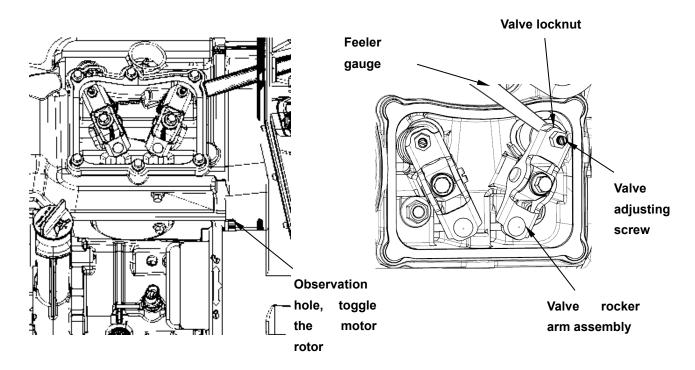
VALVE CLEARANCE ADJUSTMENT
